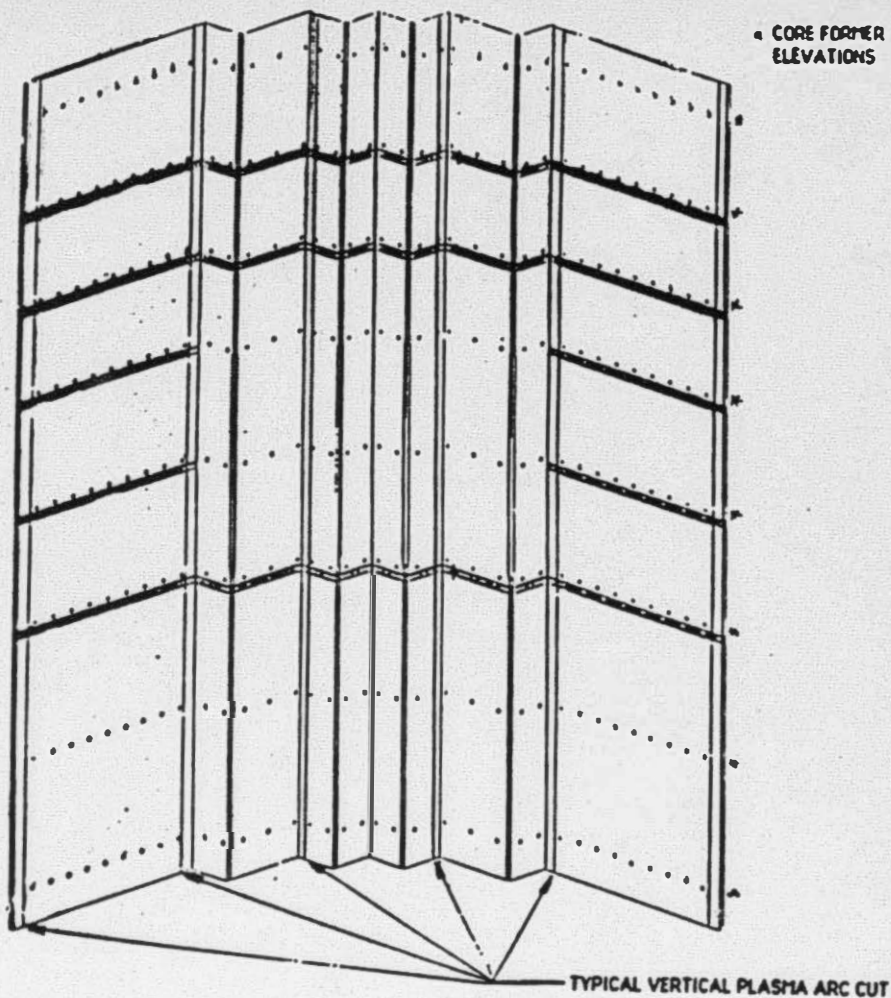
BAFFLE PLATE ACCESS OPENINGS
